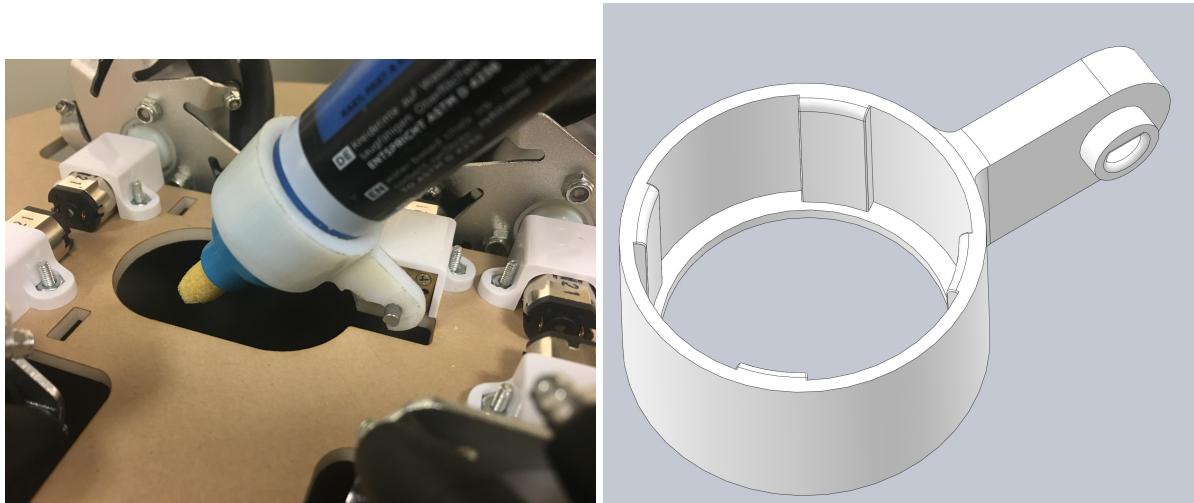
Painting Mechanism (left), Chalk Holder CAD (right)
